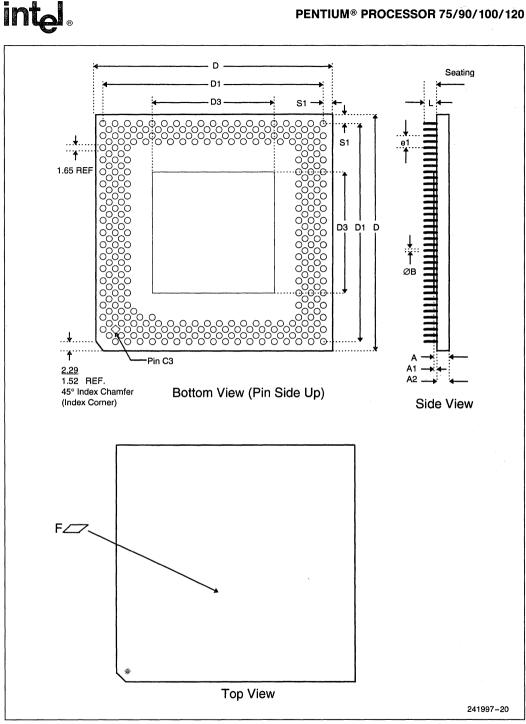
Pentium® Processor 75/90/100/120 Package Dimensions (without Spreader)
